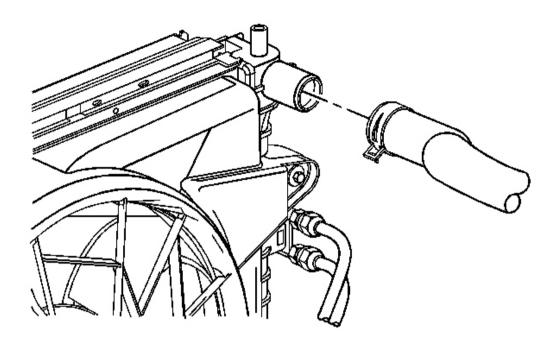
View Of Radiator Inlet Hose Courtesy of GENERAL MOTORS CORP.
